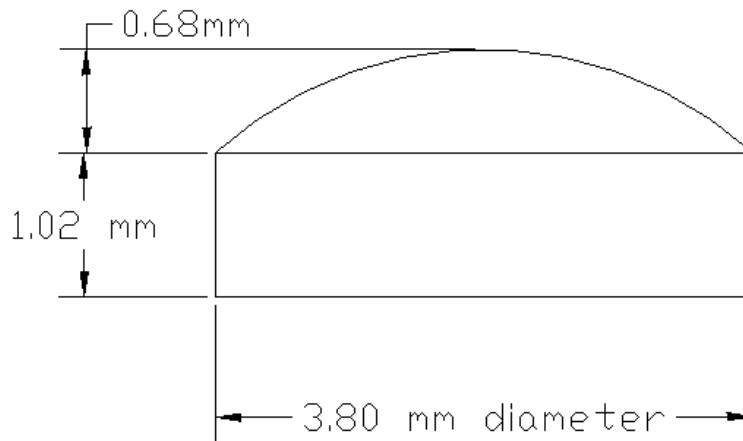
Dimensions of cylindrical Mg pellets with epoxy layer implanted in mouse 'beta'
